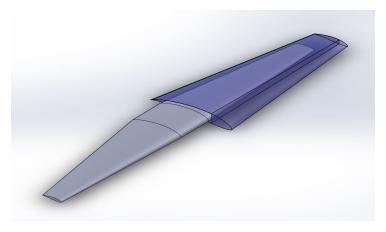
Manufacturing wing housing production wing behind quarter chord Wing Control Surface Sizing
